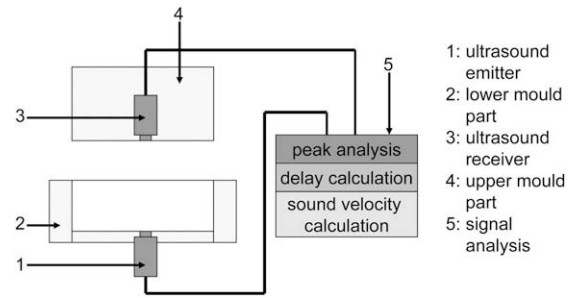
Setup of the mould equipped with the ultrasonic online control.
